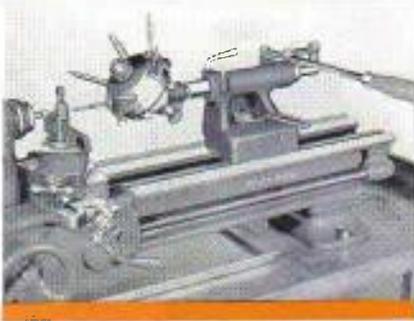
6-Hole Turret on Tailstock Spindle. Cat. No. 943-W. Turret only. \$39.00 Fitted. Cat. No. 785. Hand Lever Tailstock in Lieu of Regular Tailstock. \$30.00
